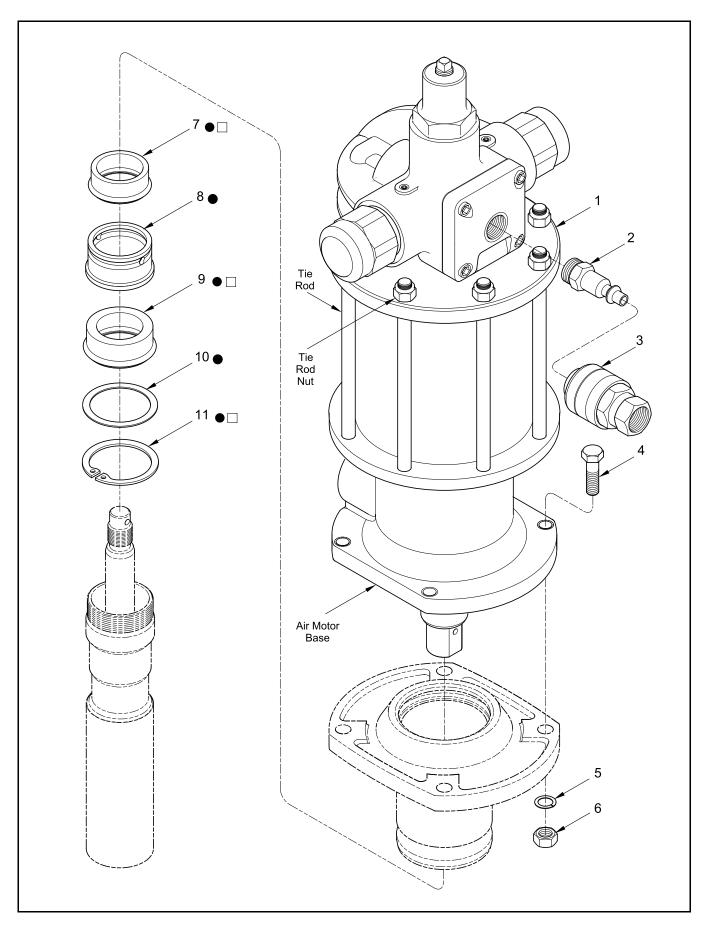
A Medium-Pressure Bulk Grease Pump Model 7736 - Exploded View
